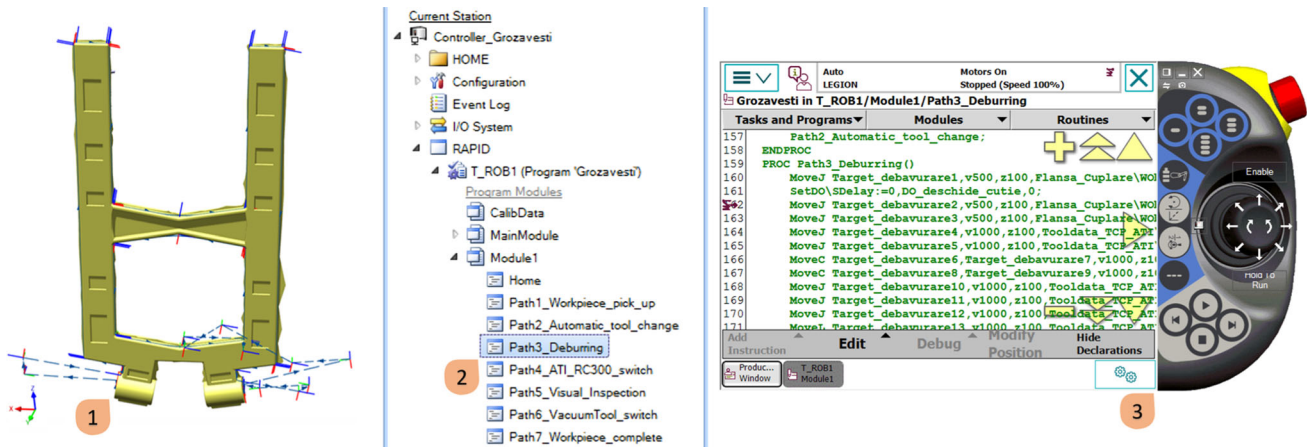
Robot deburring tool path (1), operations sequence (2) and the robot program loaded and shown on the robot flex pendant (3)
